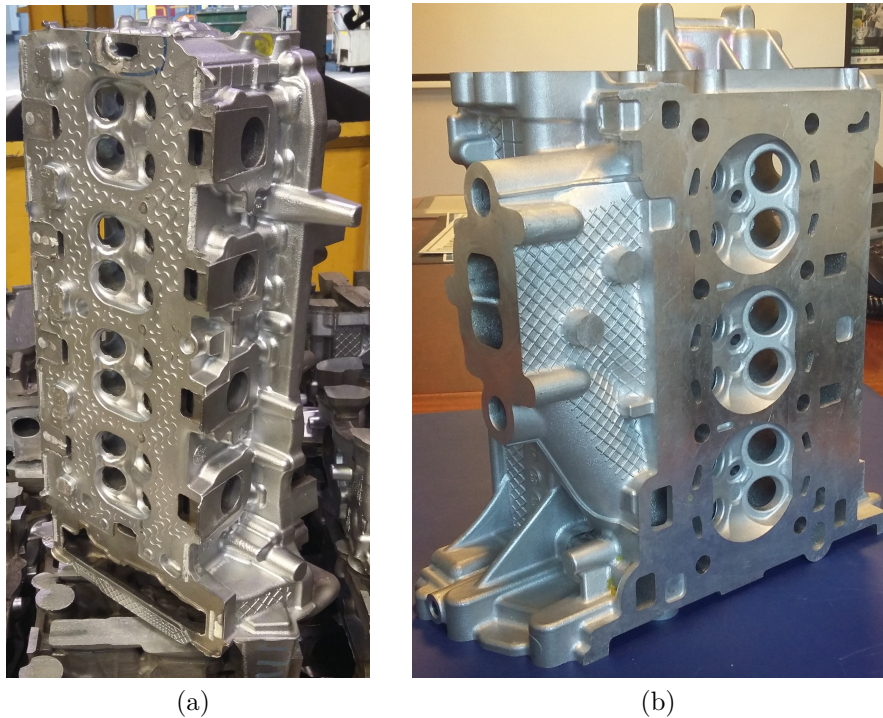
Cylinder head of (a) 4.0 liter V8-turbo BMW engine (b) 1.0 liter Ford engine with integrated manifold exhaust [Mon15].
